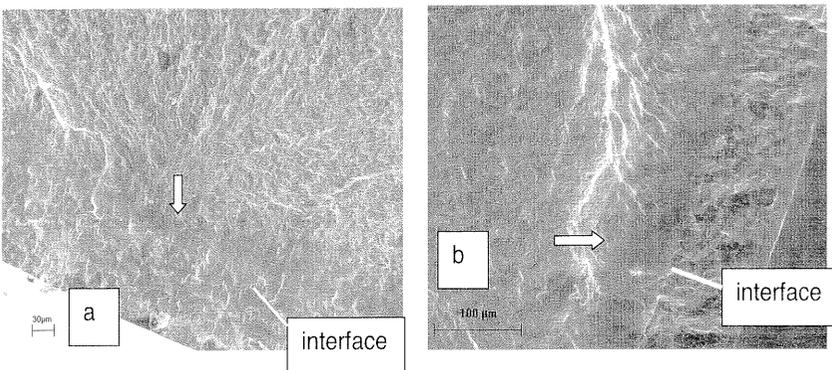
Fatigue fracture surfaces: base material with shot peening and chromium plating a) 53HRC b) 39HRC.
